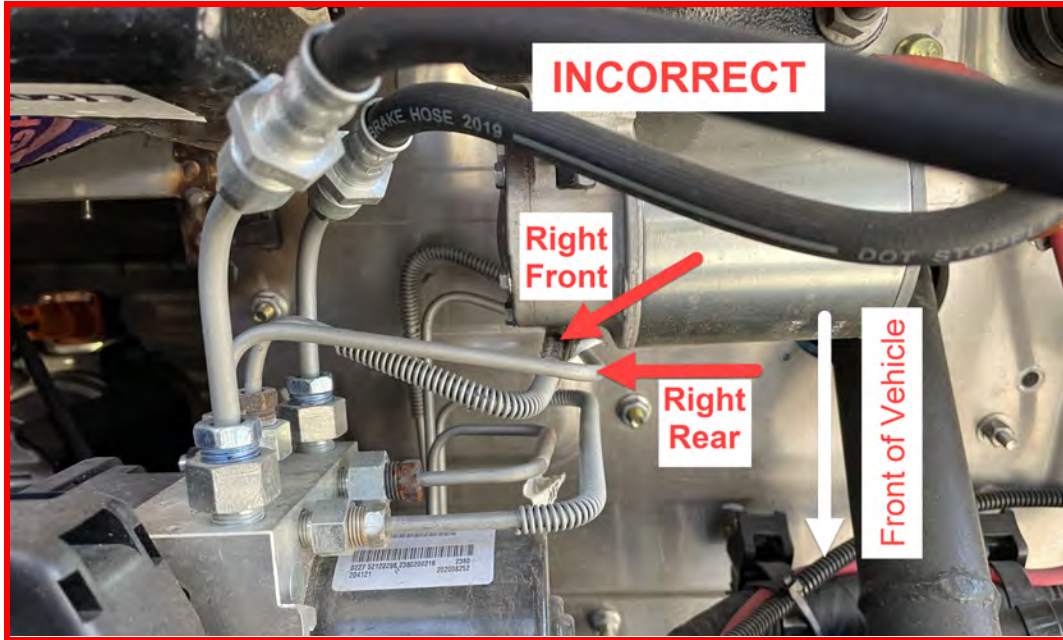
INCORRECT Brake Line Routing (Right Front & Right Rear)
